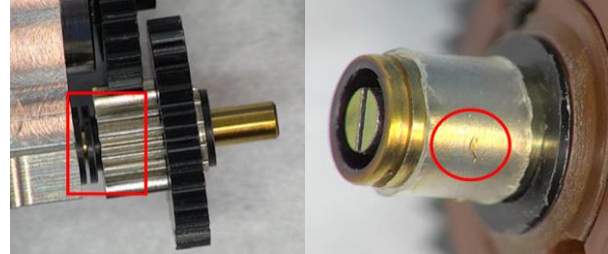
Inspection findings (left: washer + sleeve slid out of the gear; right: metal particle close to electrical contacts)
